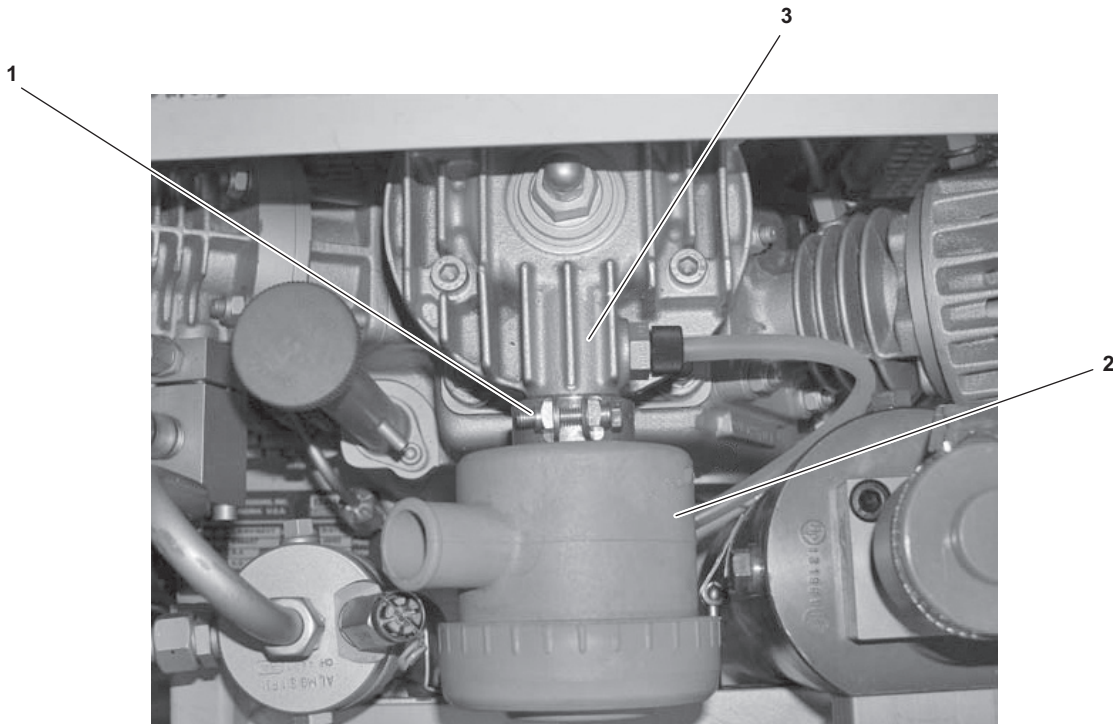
Air Inlet Hose, Hose Clamp, and Air Filter Housing
